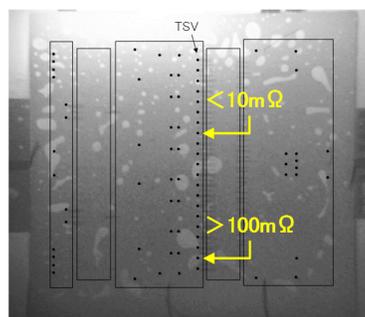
X-ray transmission image after bonding a die using AuSn solder.
